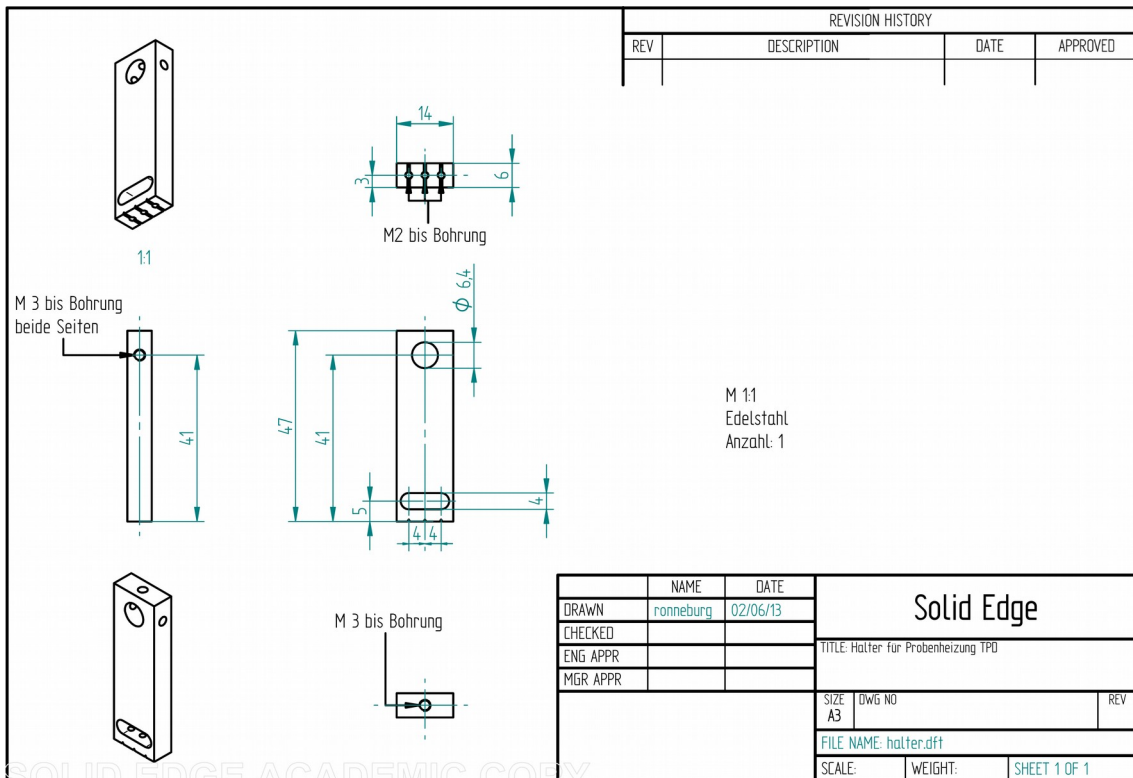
Holder, to be mounted onto the transfer rod of the heater.
